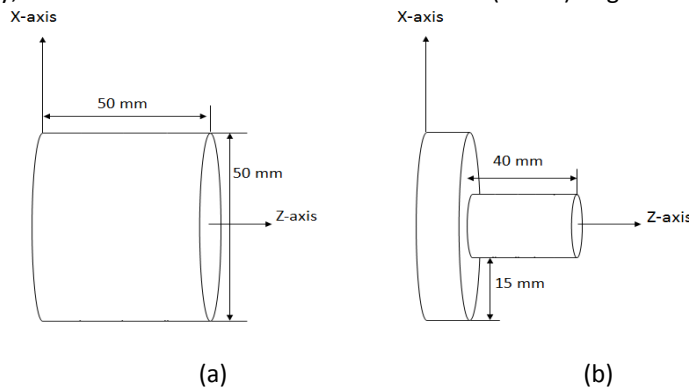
Shape and size of geometry workpiece (a) and its output product (b).
